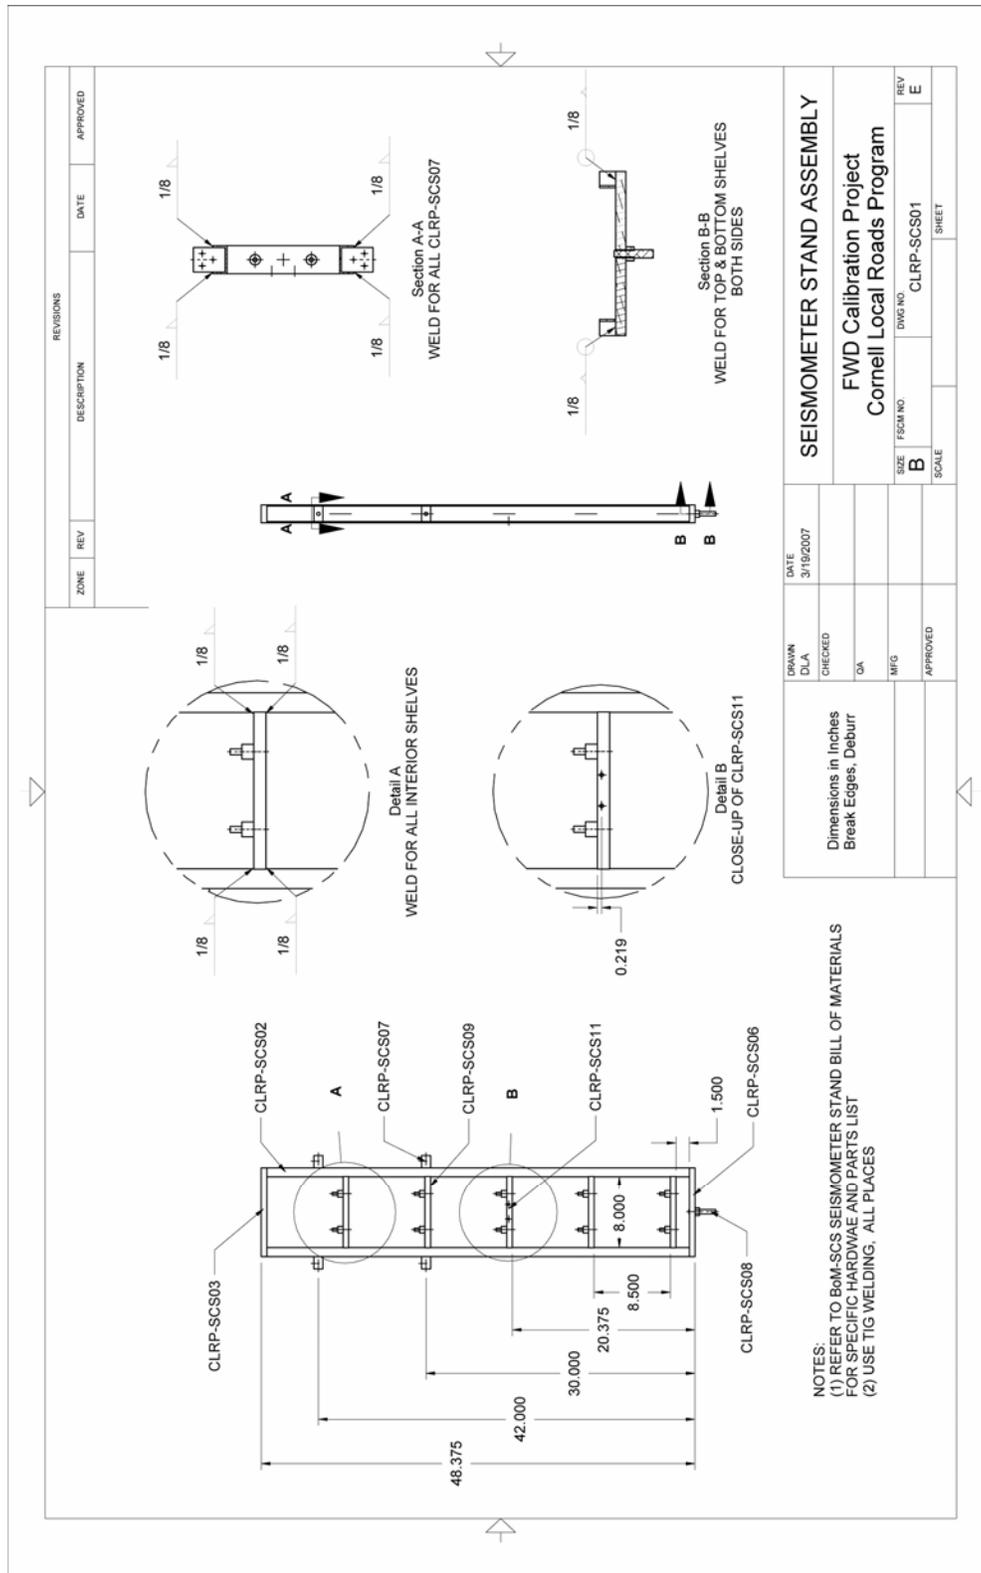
Drawing. CLRP-SCS01 Seismometer Stand Assembly.
